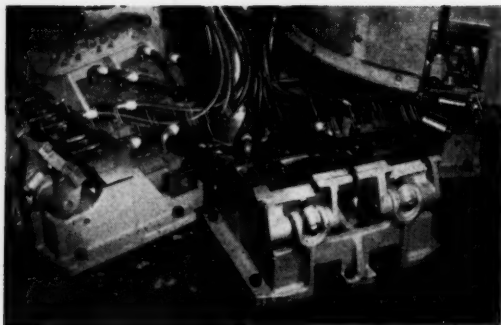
Close-up view of rotary table of grinder showing automatic clamping fixtures mounted thereon for holding blow shares during grinding
